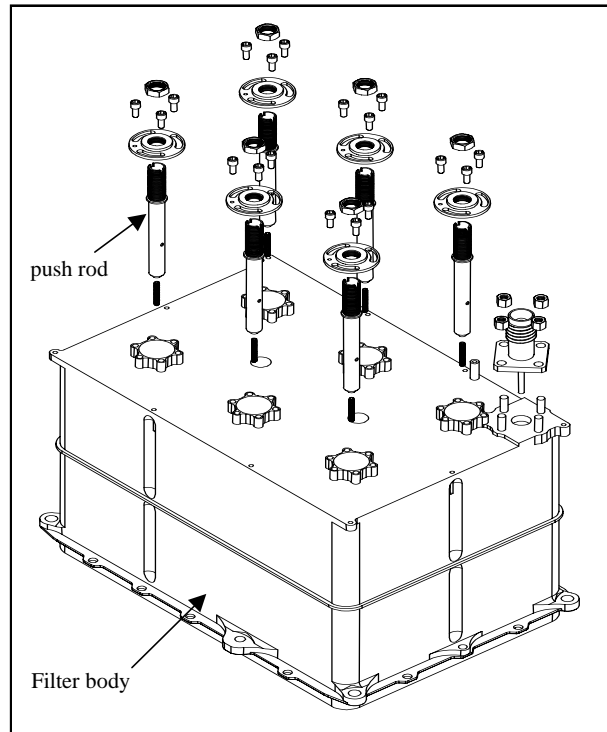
Exploded view of Inmarsat-4 Transmit Bandpass Filter
